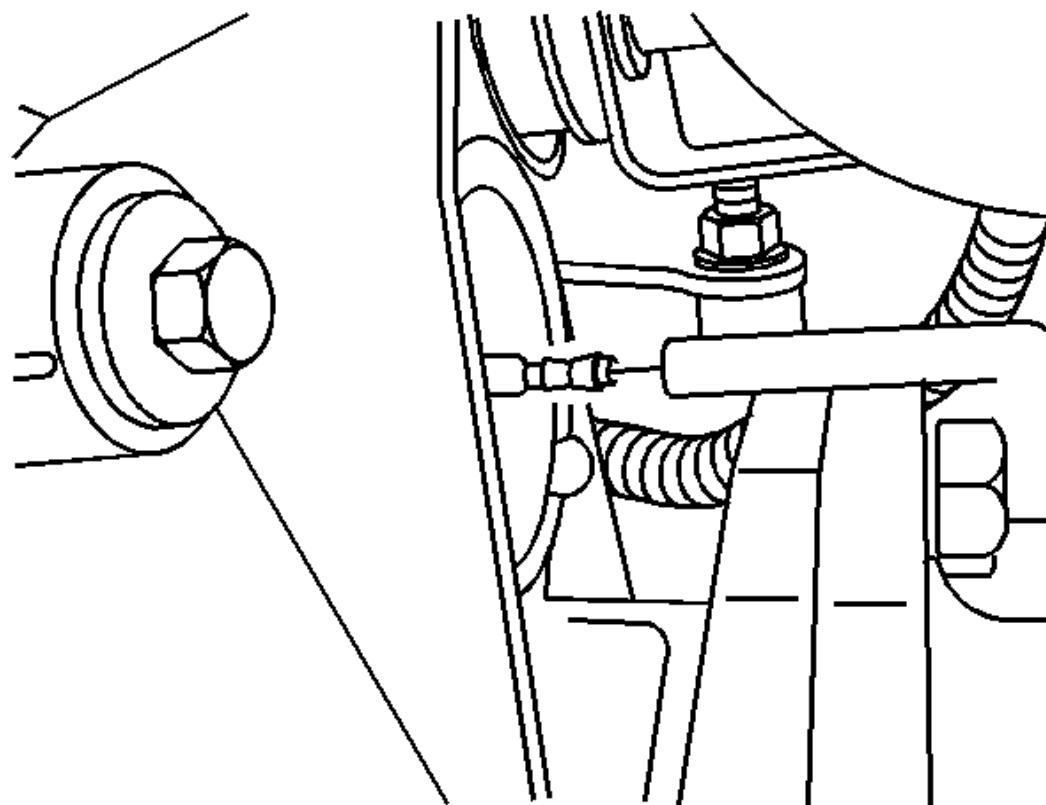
View Of Vent Hose To Differential Carrier Assembly
